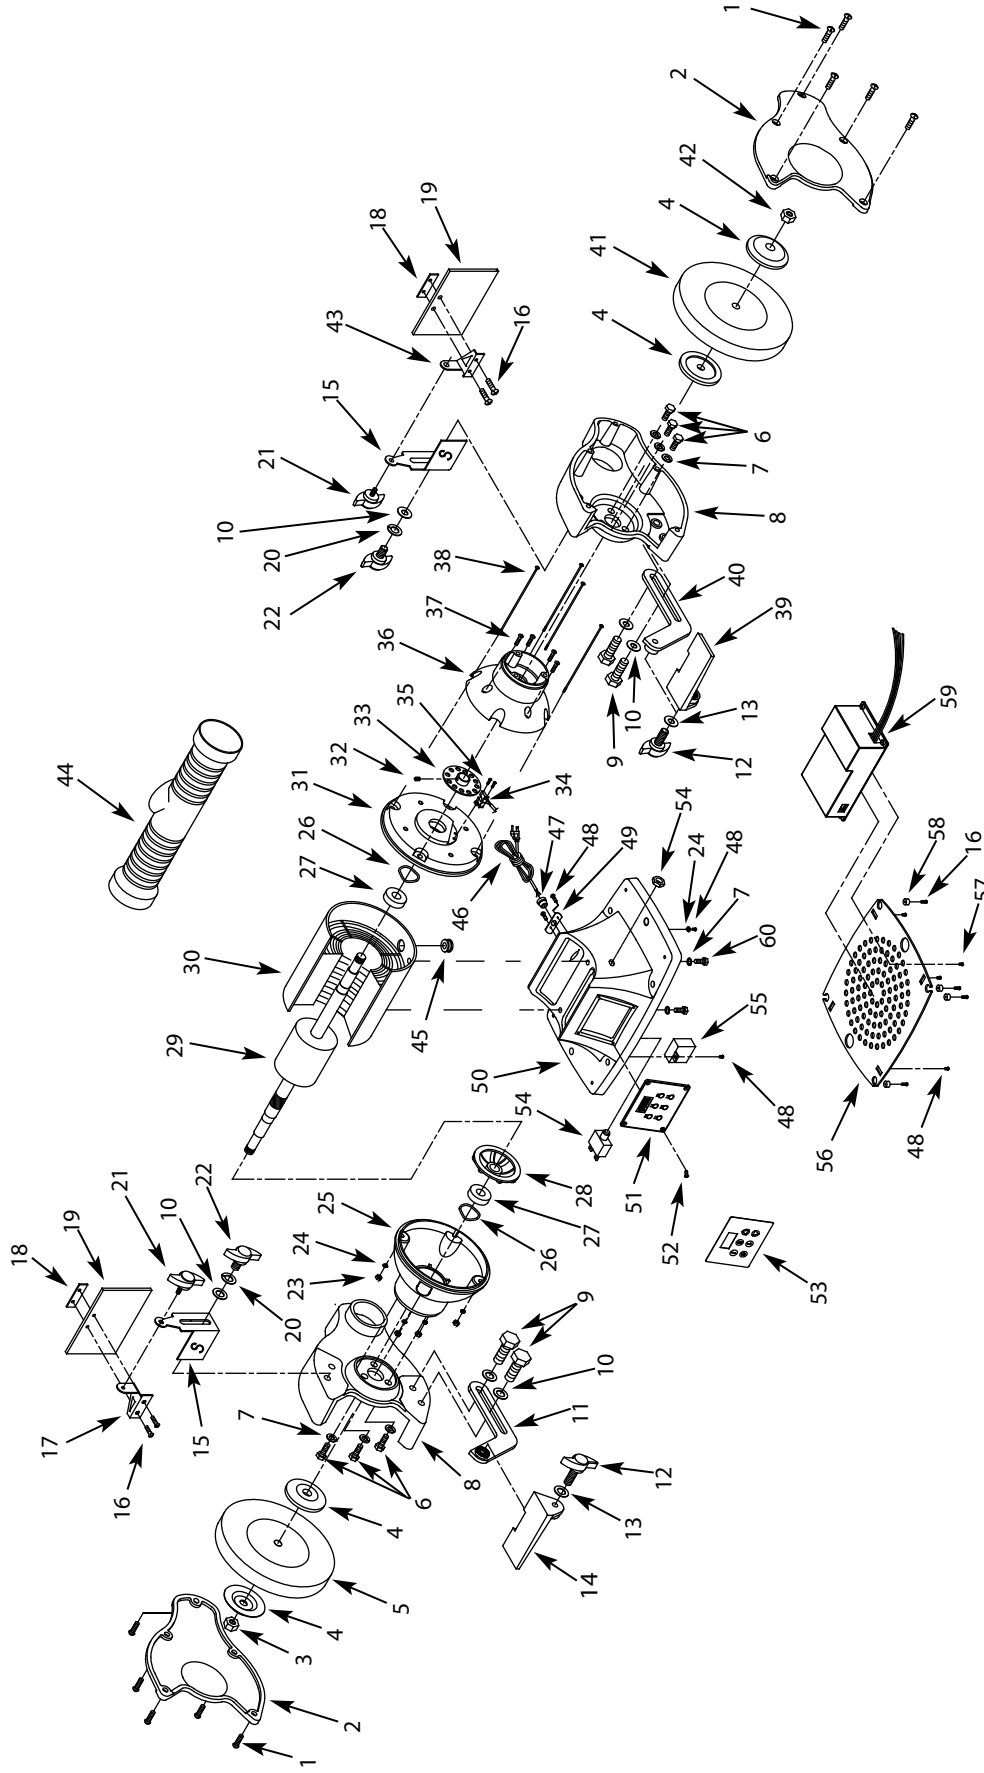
Replacement Parts Illustration for 6" Variable Speed Bench Grinder
